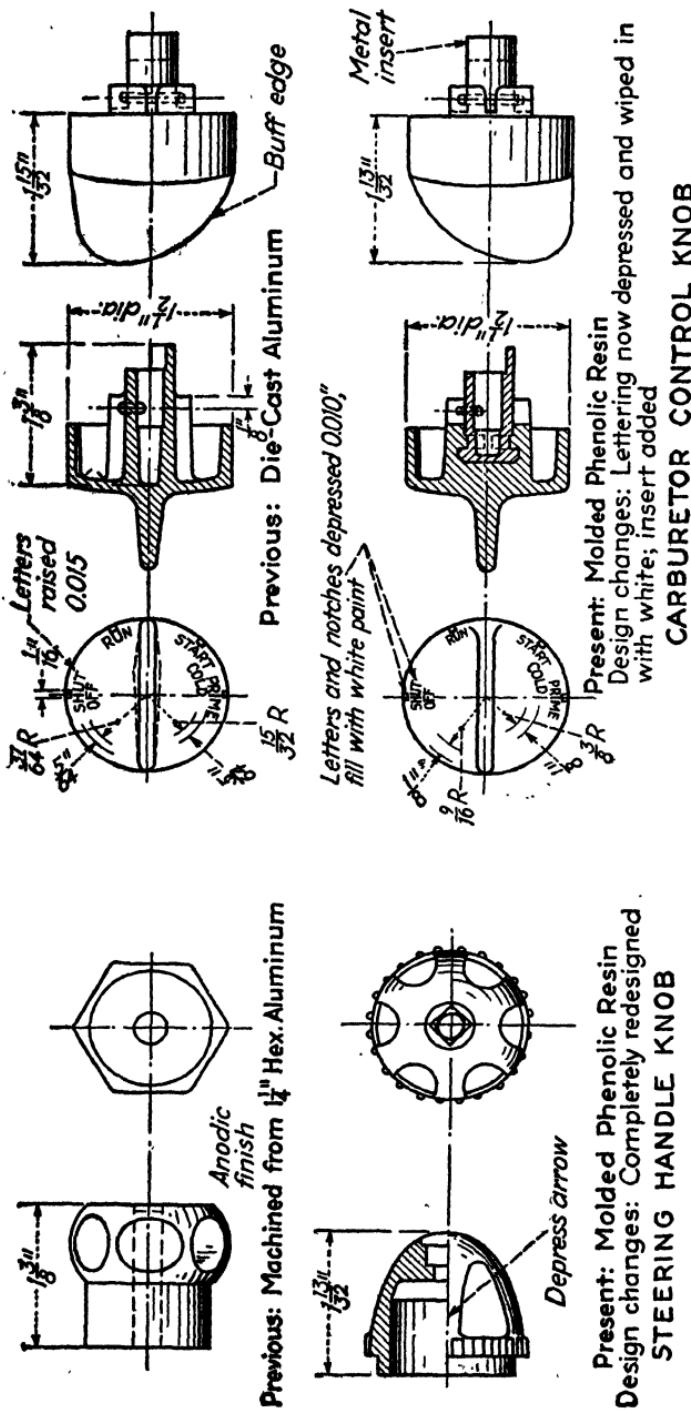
Typical design details of industrial parts molded of phenolic material, showing previous designs in metal.
